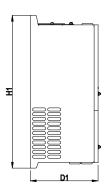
Wall installation diagram for 220V 7.5-18.5kW/380V 15-37kW
